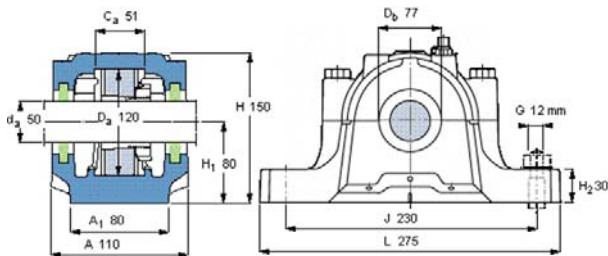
Dimensions of bearing housings SNL FSNL 513-611 [10]
